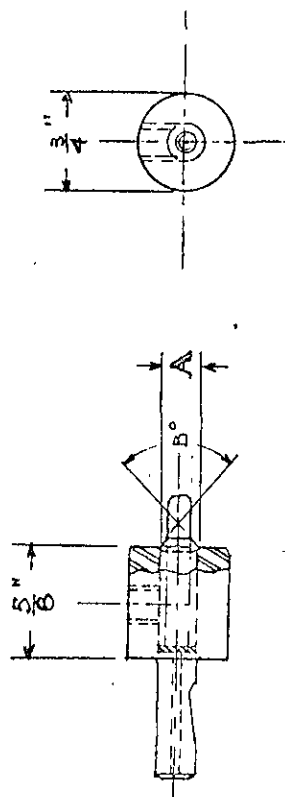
RUDDER ASSEMBLY LOCATING FIXTURE
